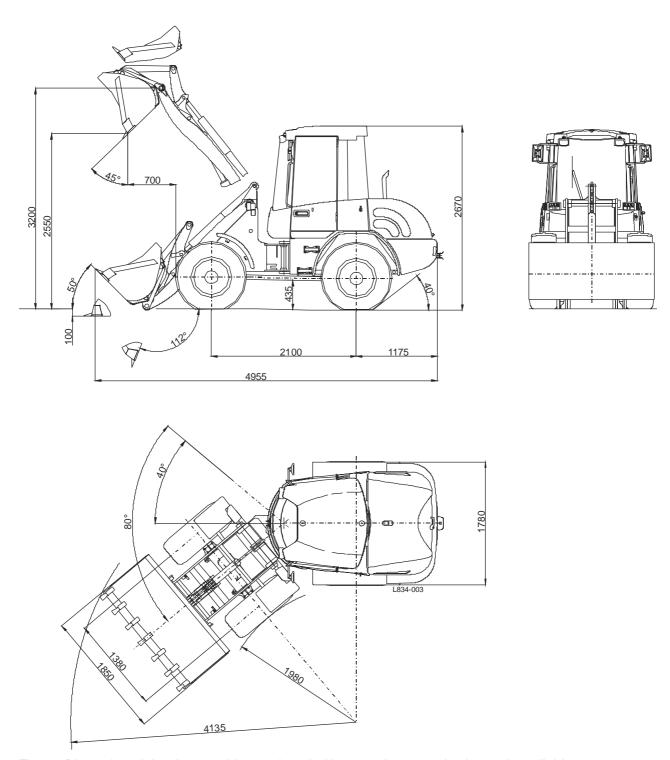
Dimensioned drawing, machine equipped with general-purpose bucket and parallel-boom geometry 405/70 R18 tires
